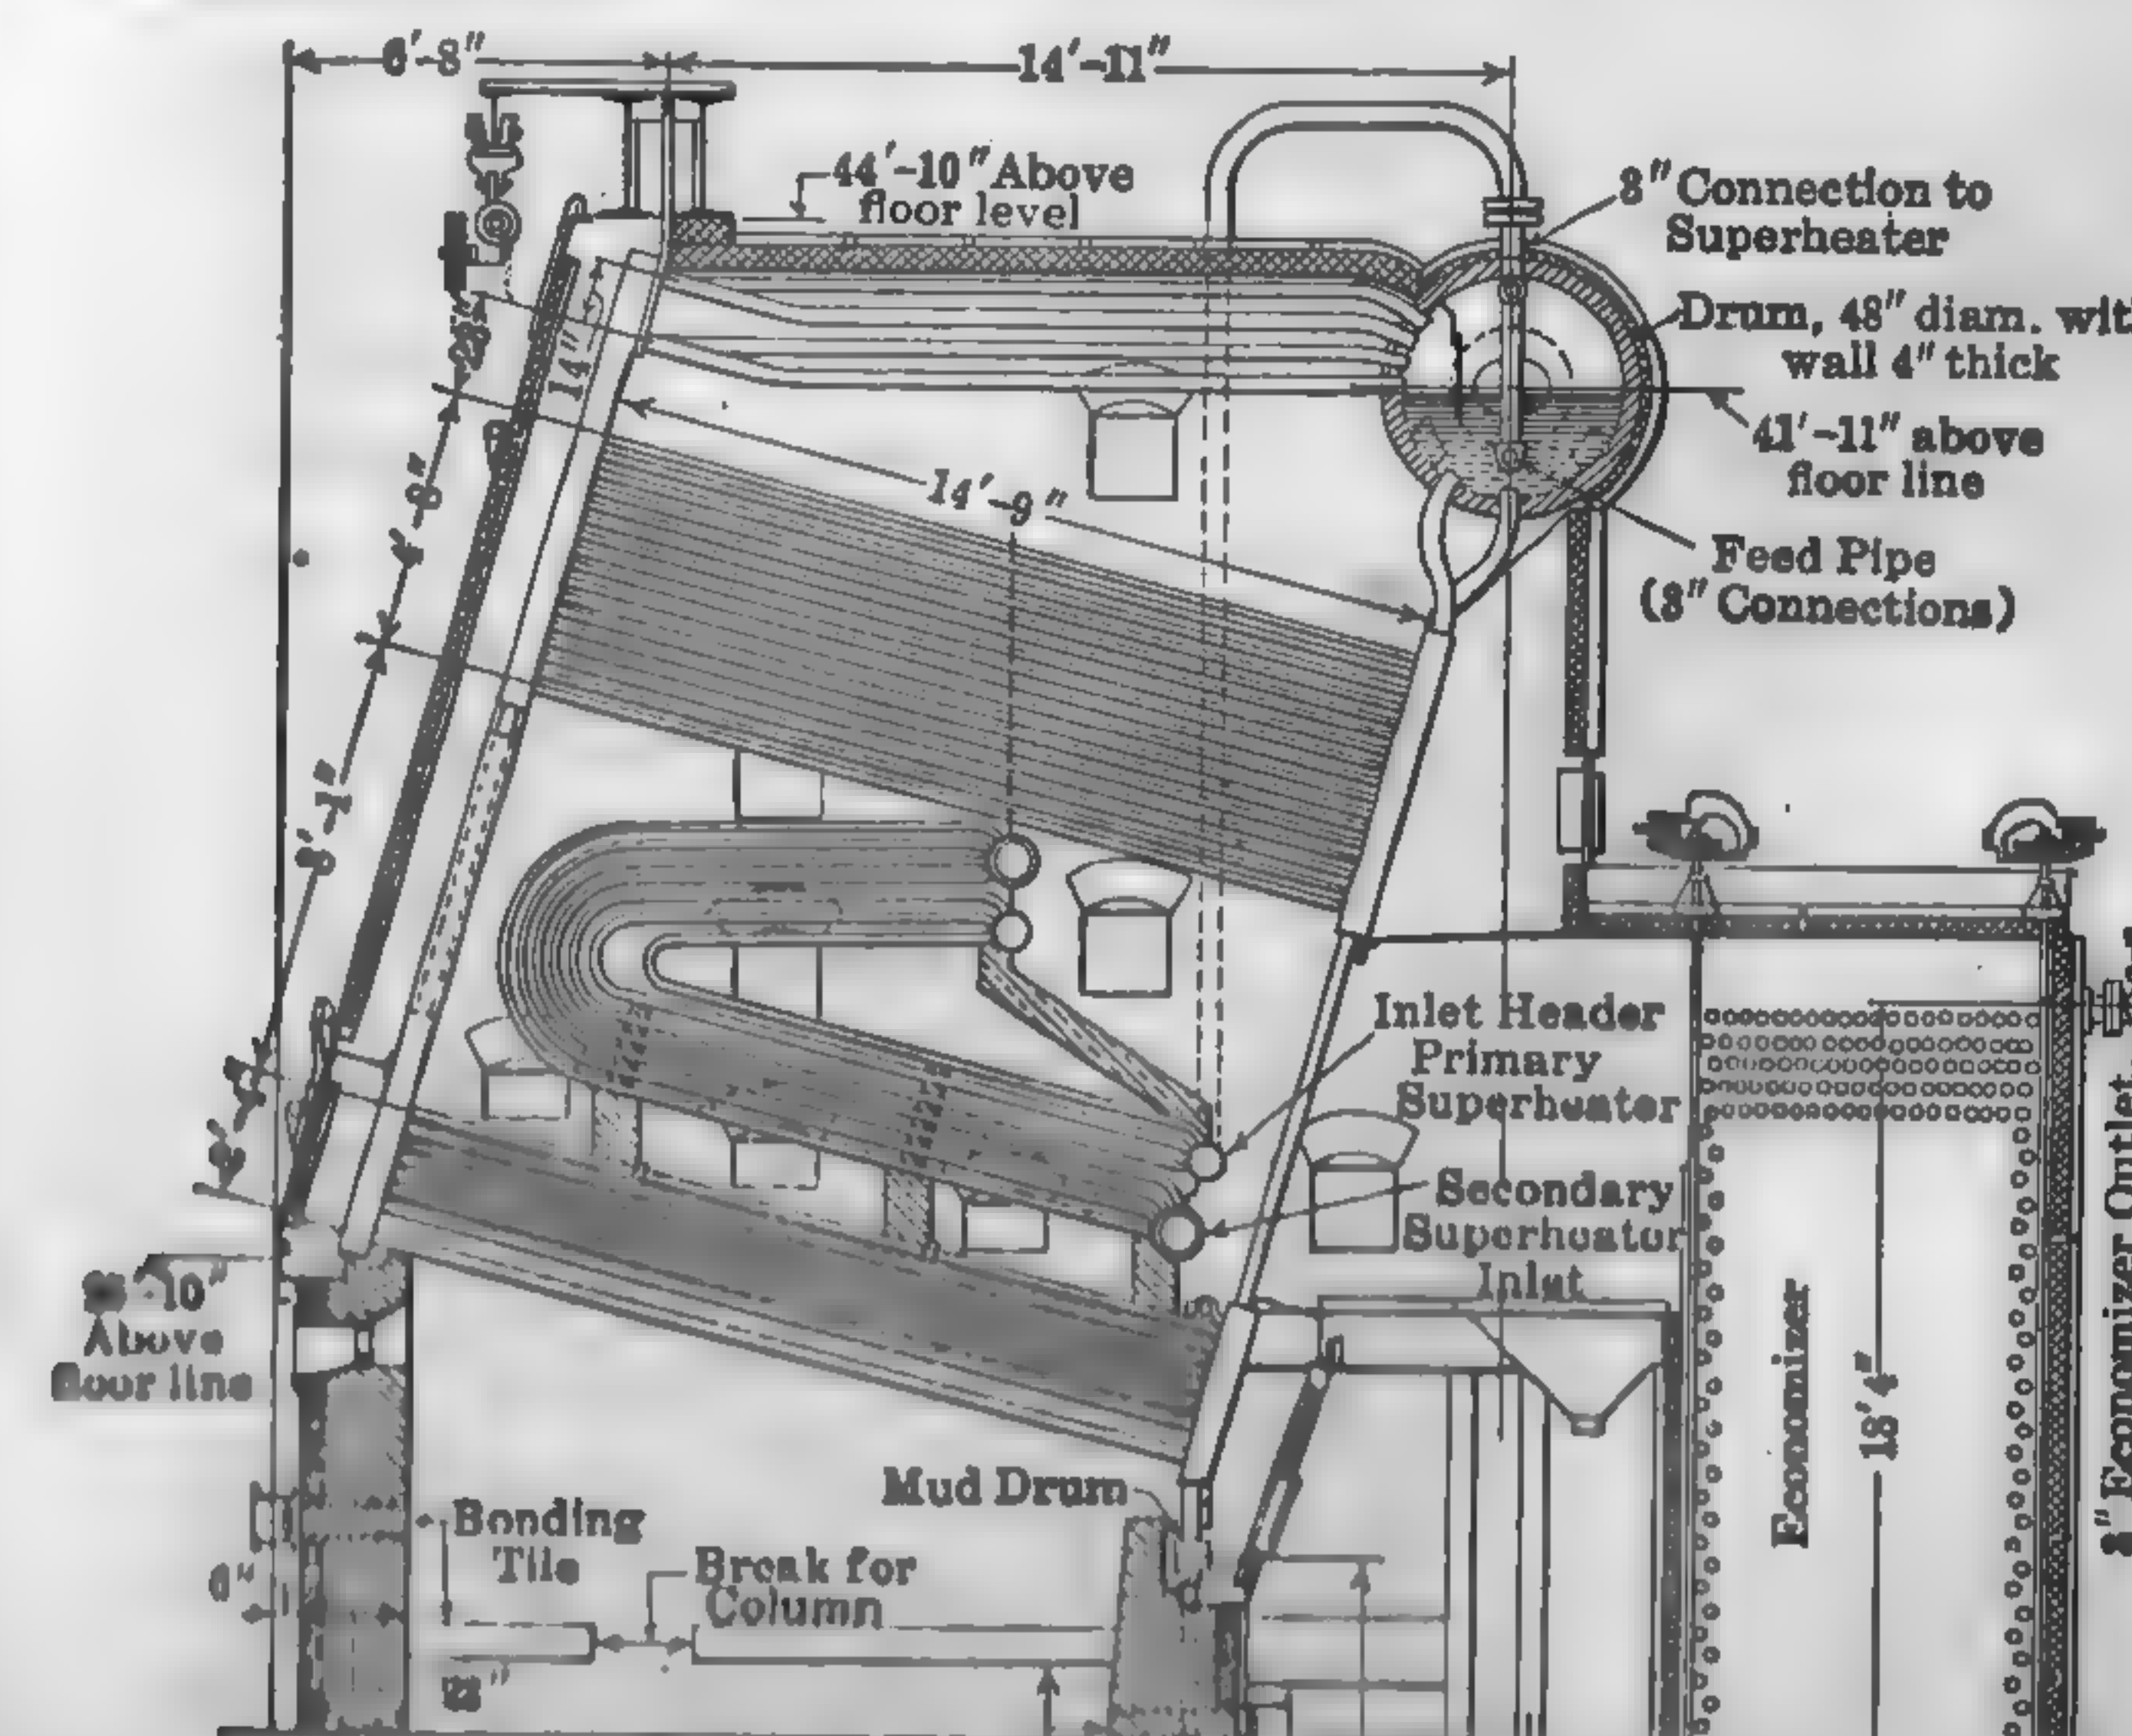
1200 lb. B. & W. Cross-drum Boiler.
